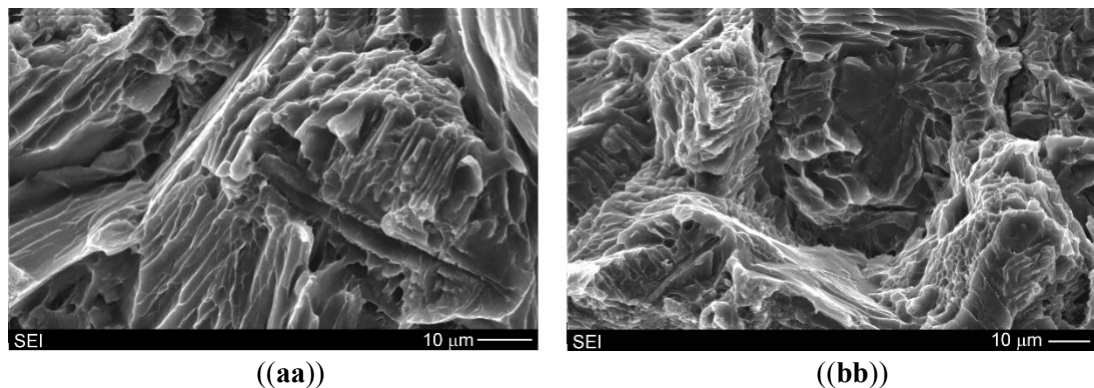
SEM micrographs of Mg/Mg₂Si–HO composite fracture surfaces illustrating cracking
